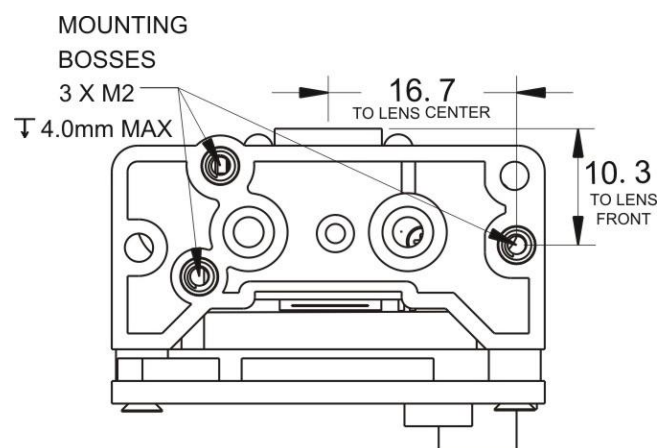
Lens center dimensions of the bracketed image engine (Units = mm)
